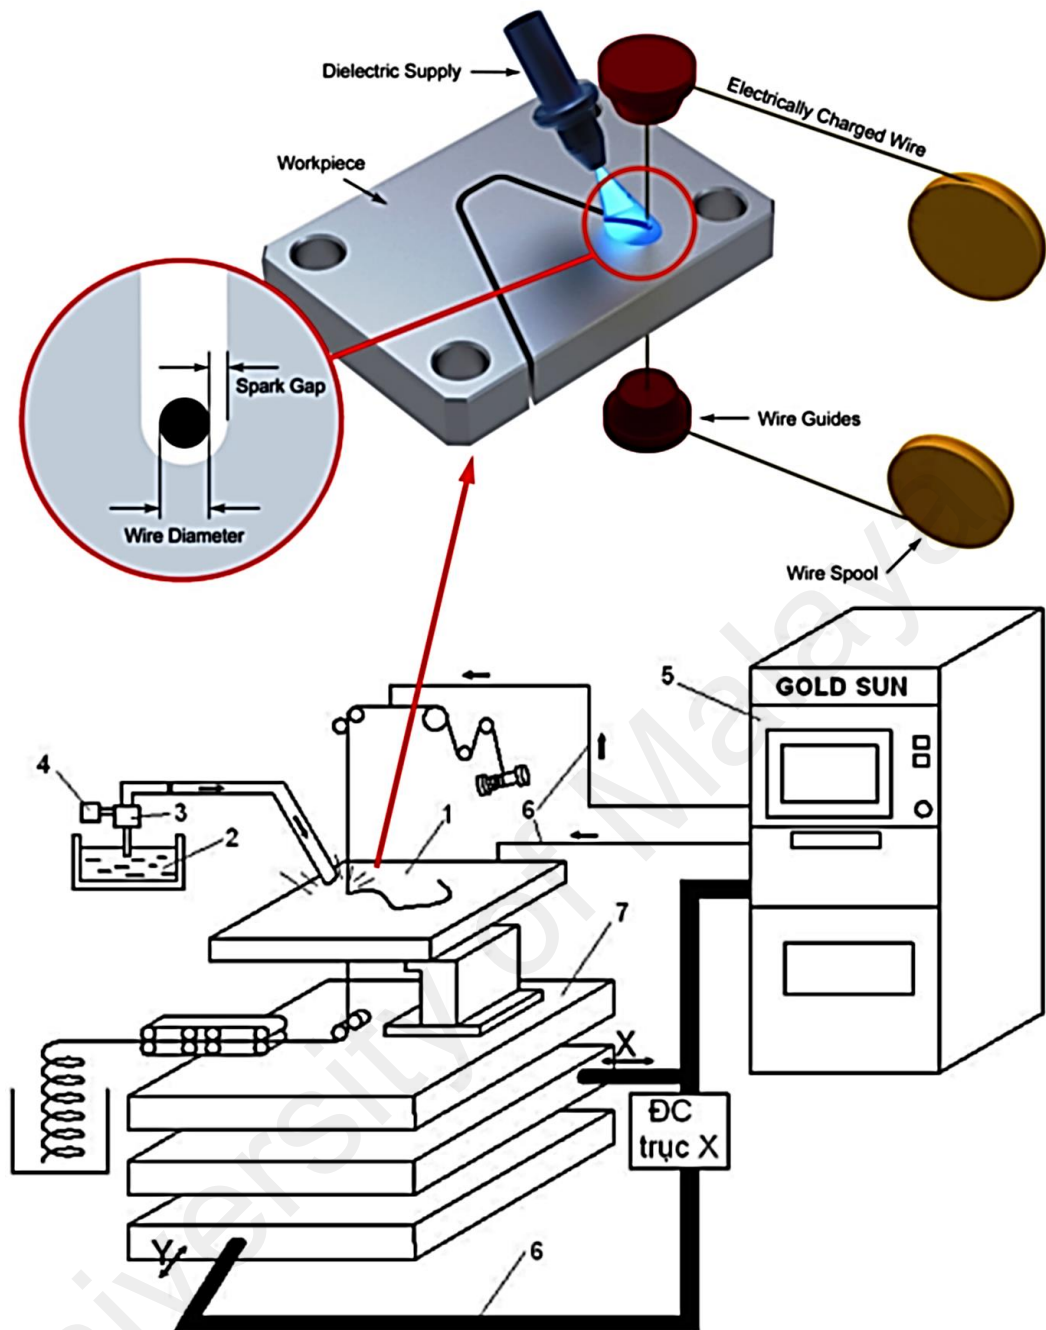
WEDM machine components (1-workpiece, 2-dielectric fluid, 3- pump, 4- pressure gaga, 5- power supply, 6- X-Y control unit, 7- machine table) (Jameson, 2001)
